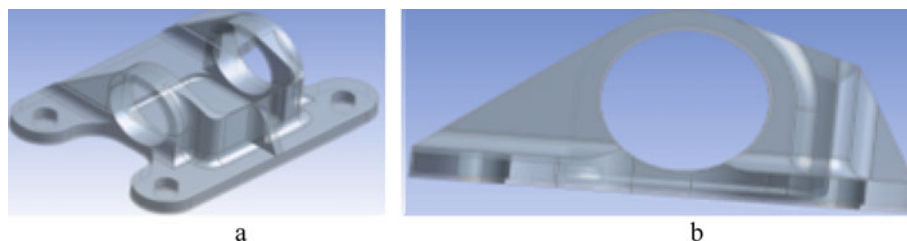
The part localization in the workpiece (a) and the general view along the XY axes (b)
